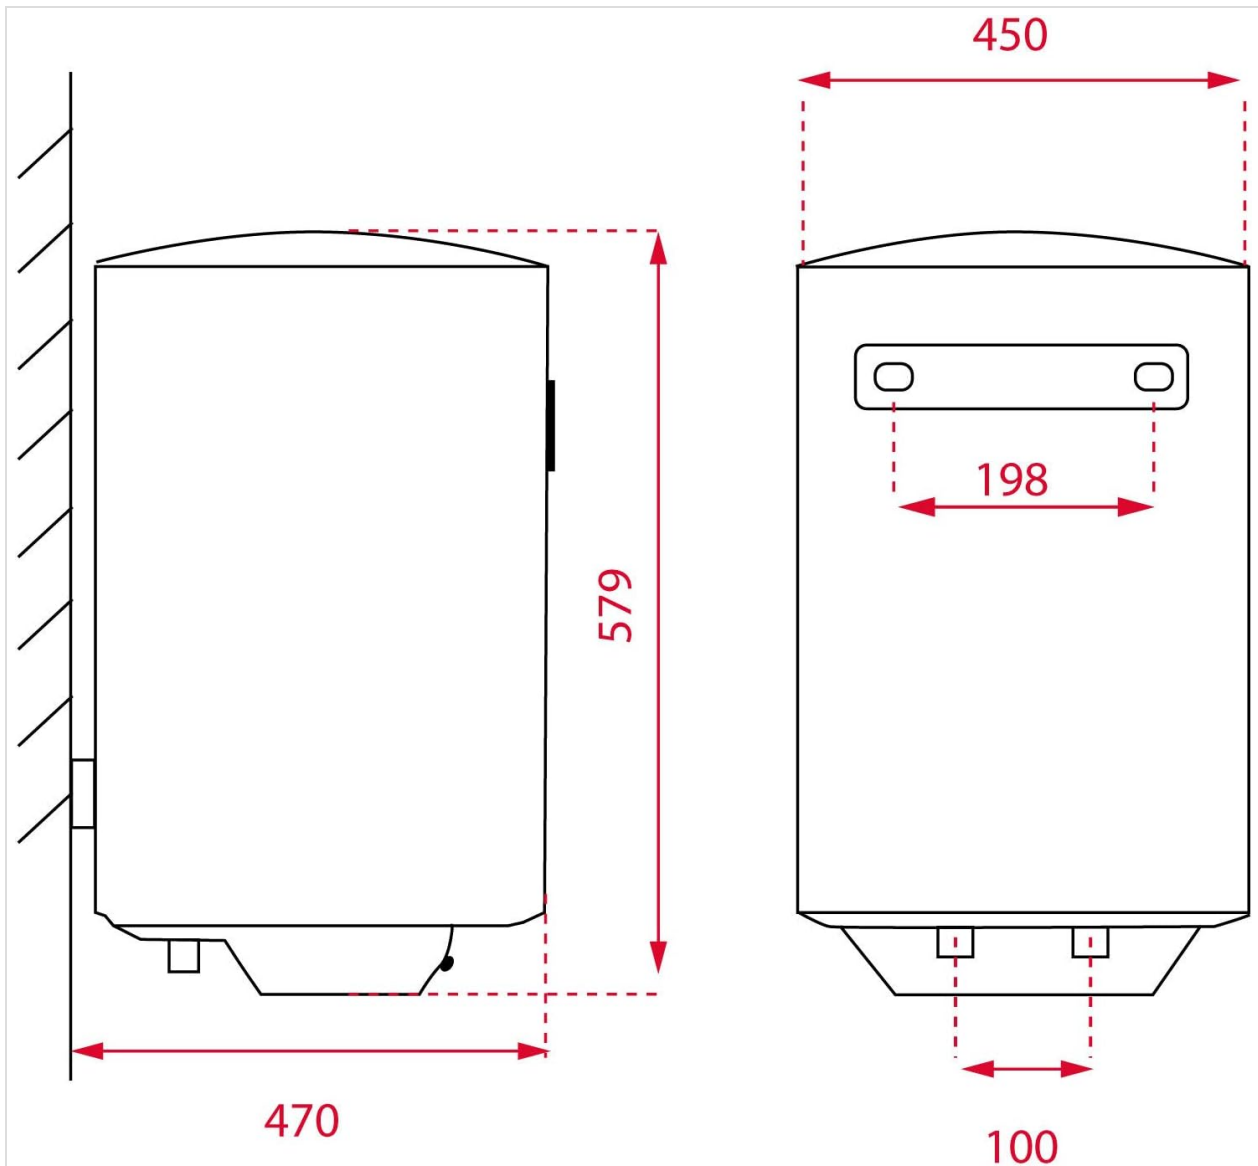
Technical drawing showing the dimensions of the Teka EWH 50 Electric Water Heater (Height: 56.7 cm, Width: 45 cm, Depth: 47 cm).
